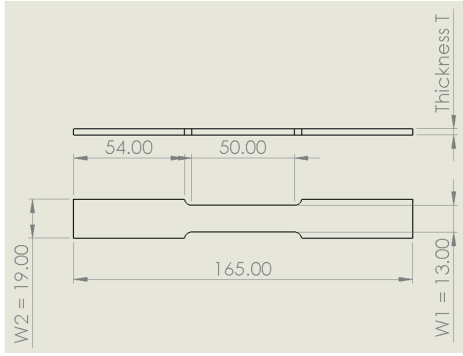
Specimen dimensions used in testing for material properties of TPU under tensile load. Specimens with thickness 3 mm and 5 mm are tested.
